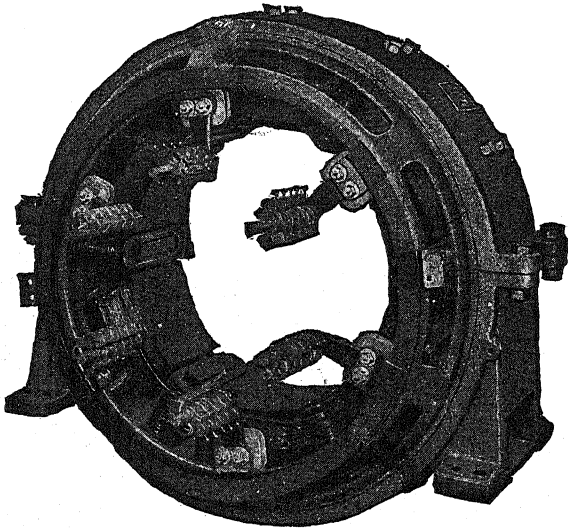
General Electric assembled frame multipolar brush gear engine type dynamo.
